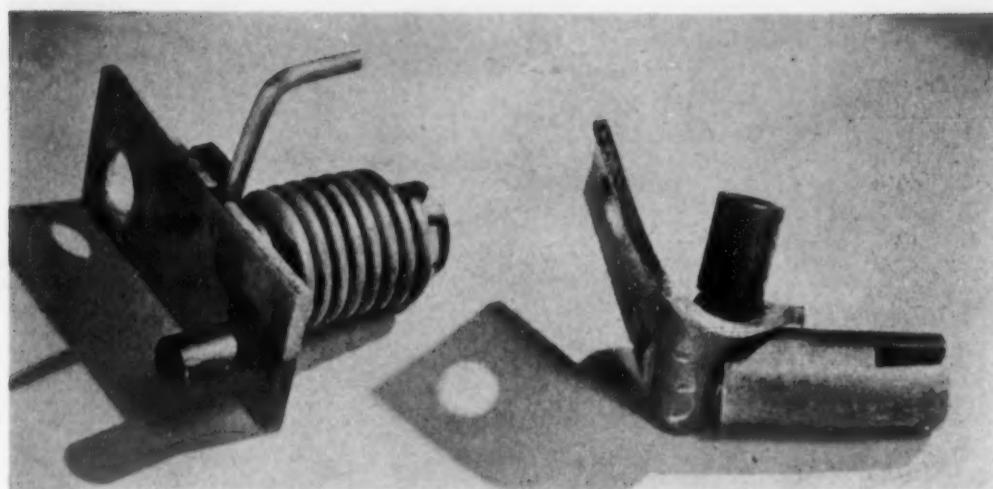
On this welded lever arm resistance welding overcame distortion and warpage which resulted from former joining methods.
